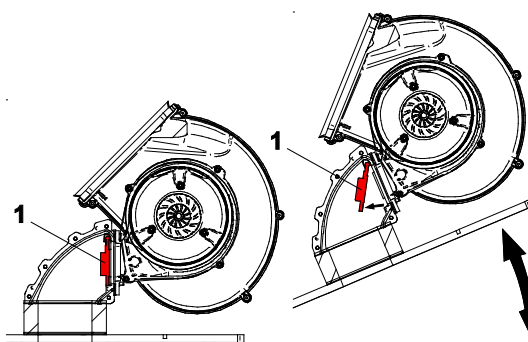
Lifting Burner Assembly and Location of the Check Valve
